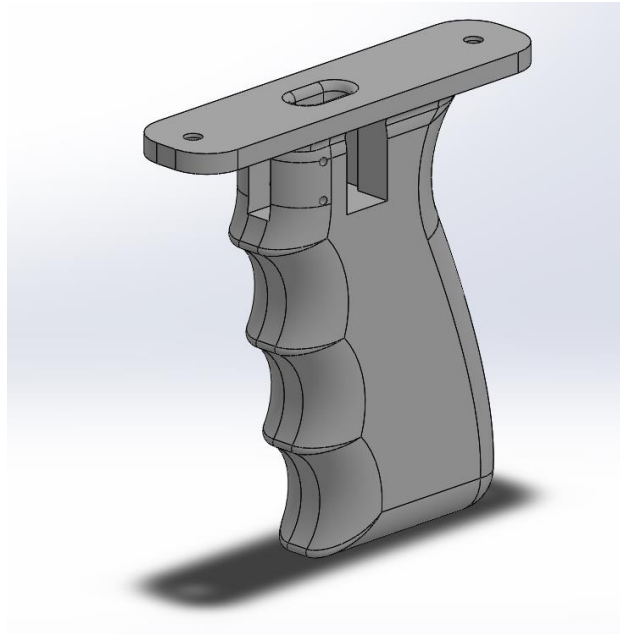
Coilgun pistol grip, showing cutouts for trigger, safety, wiring, and fasteners.
